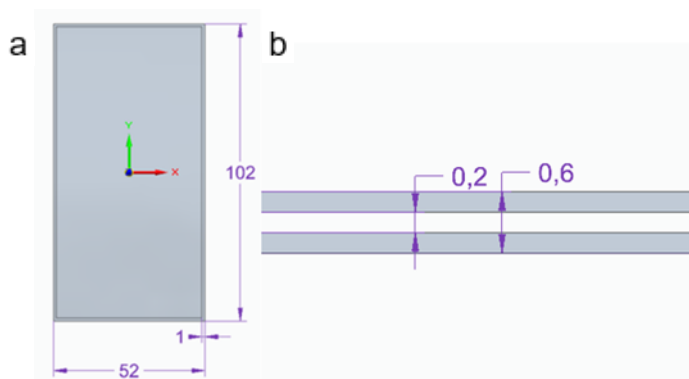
Sample dimensions: (a) general view; (b) cross-section.
